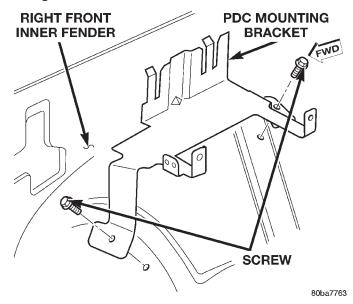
PDC Mounting Bracket Remove/Install INSTALLATION
